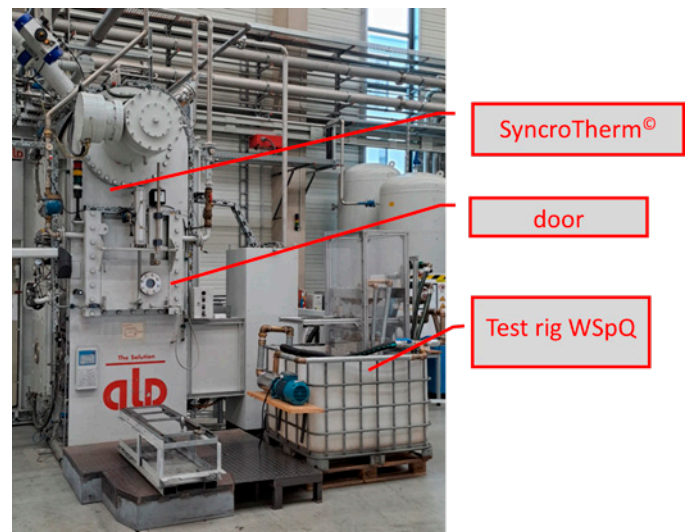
Vacuum furnace (SyncroTherm) and test rig for WSpQ.
